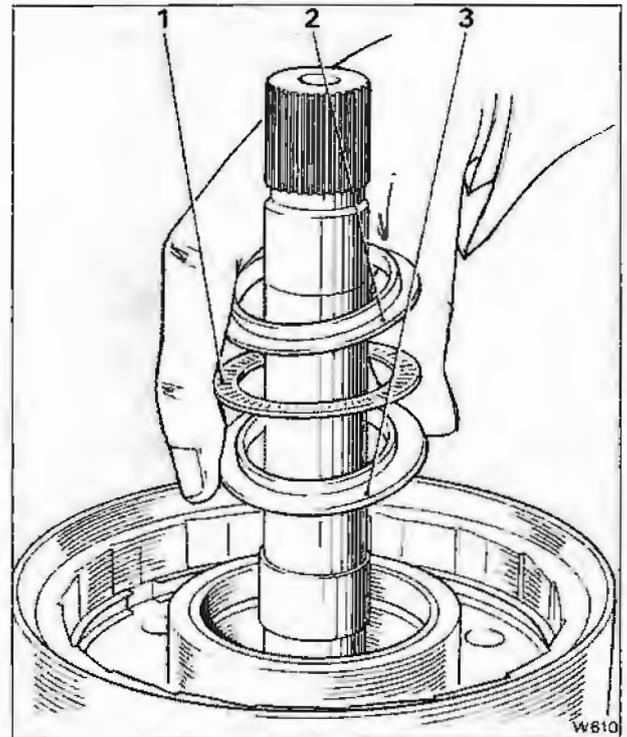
Fitting the races and thrust bearing to the sun gear
